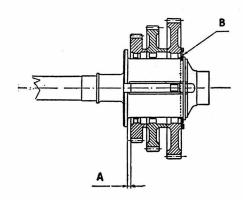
If end play of mainshaft gears measured at (A) exceeds 0.50mm (0.020 inch) install a thicker shoulder ring (B).
